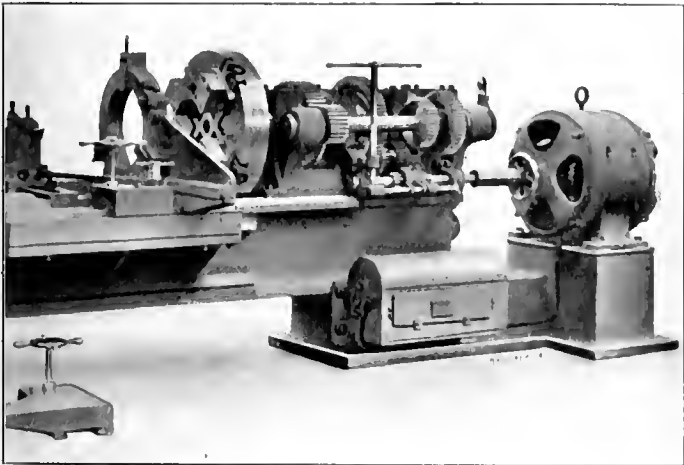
Lathe Driven by a Thompson-Ryan Motor, showing Method of Connection.
